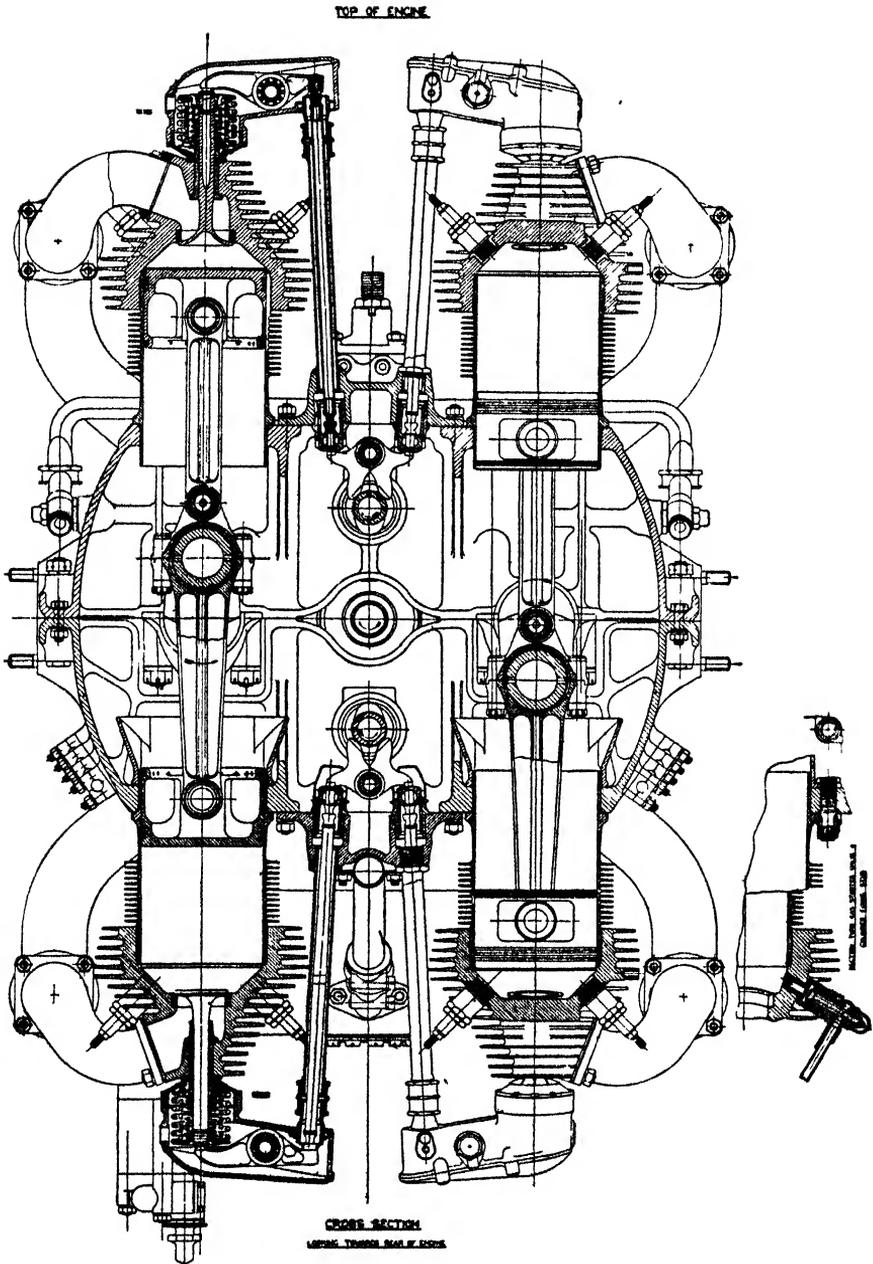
Arrangement of Cross-section of Napier Rapier Engine
